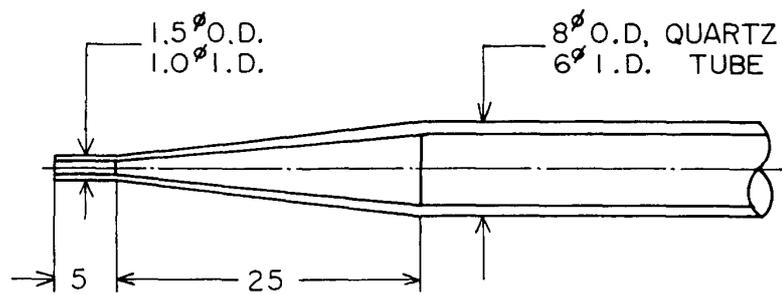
Total pressure probe II. Dimensions are in millimeters.
